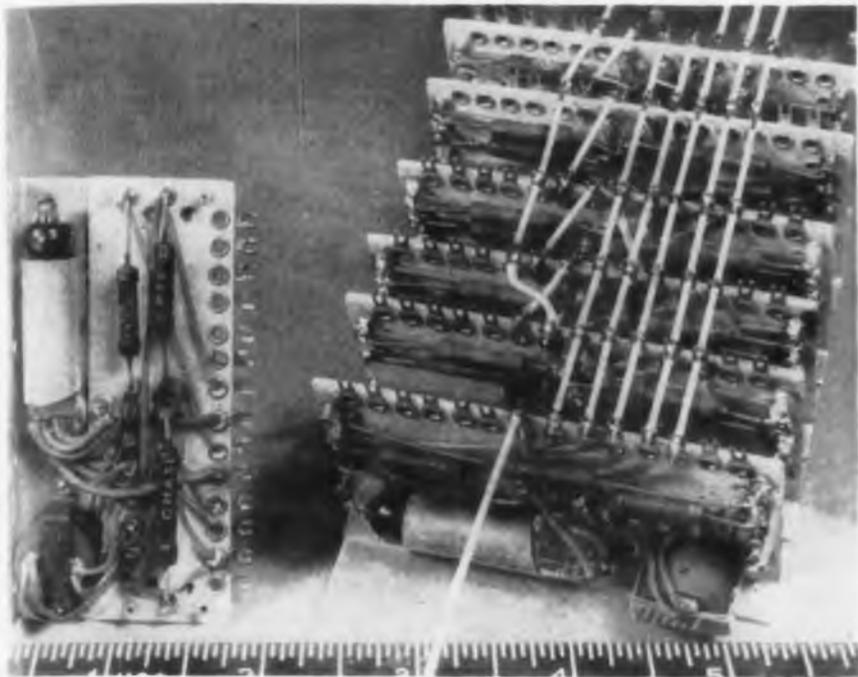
Component mounting boards are riveted to "L" bracket to form sub-chassis. Note interwiring
